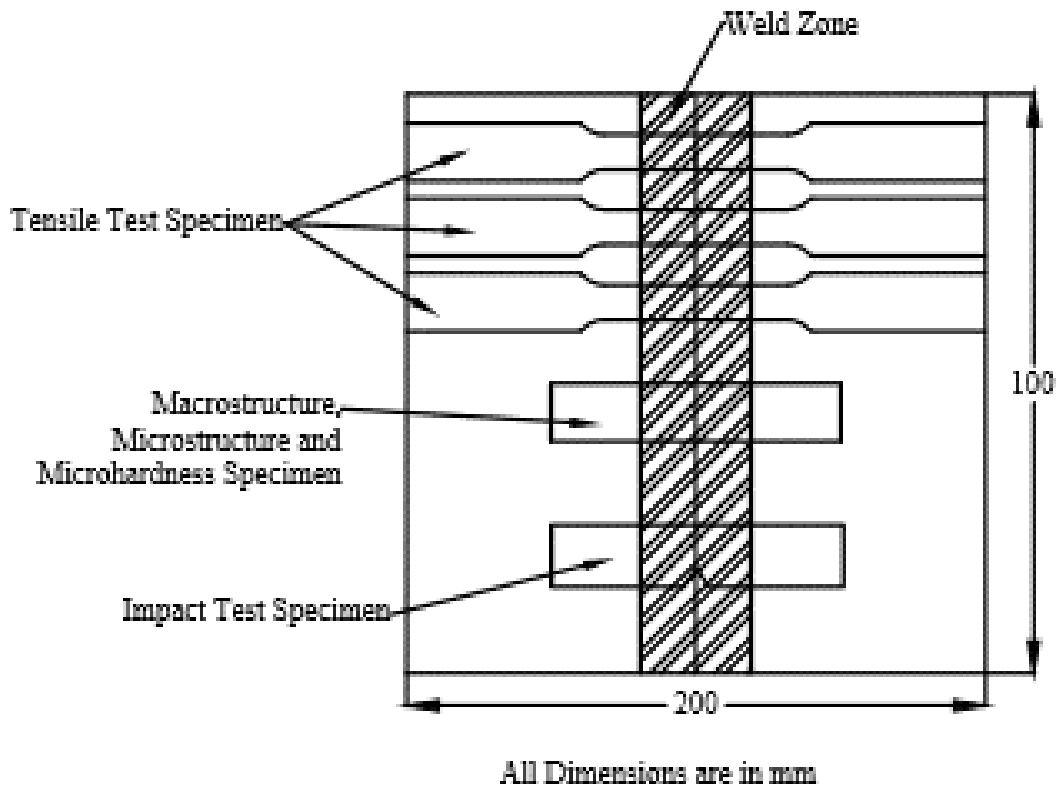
Welded joint location for microstructure, microhardness, tensile and impact specimen extraction for testing plates
